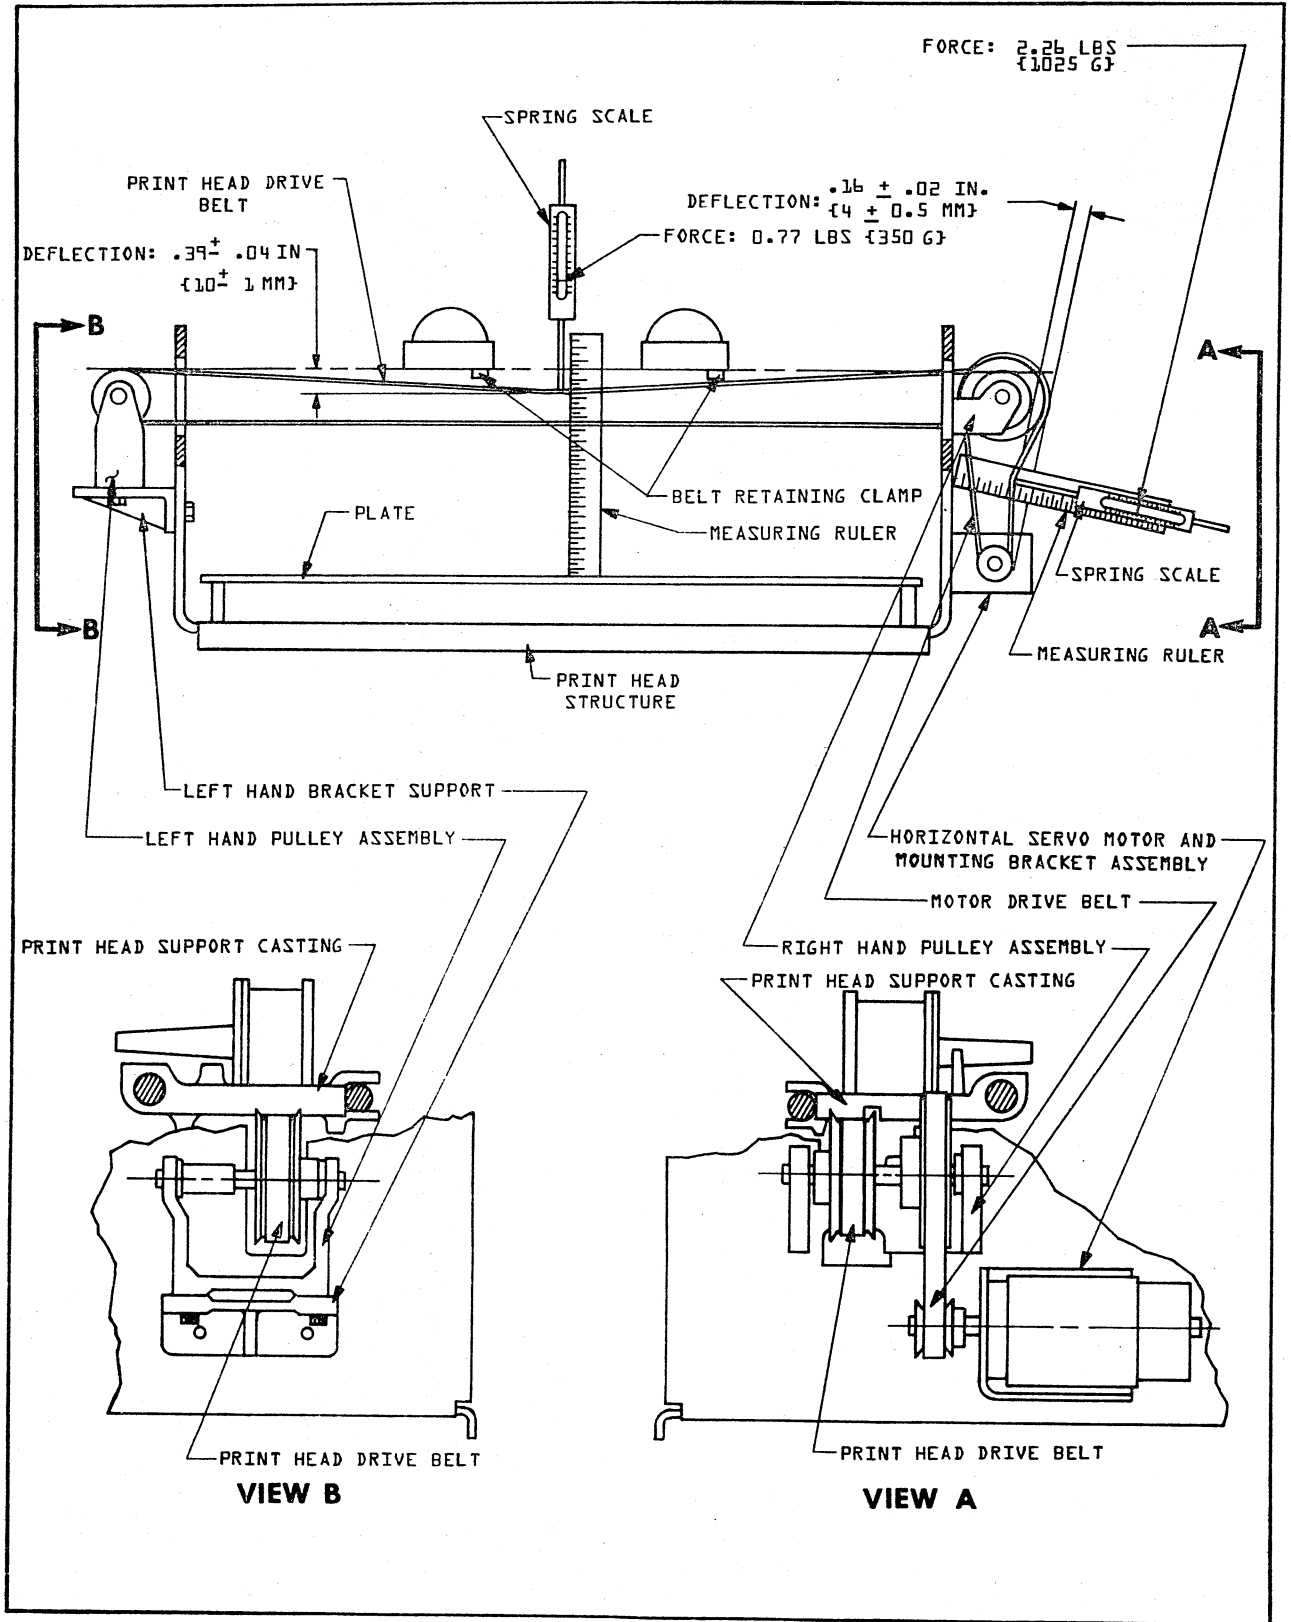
PRINT HEAD BELT DRIVE SYSTEM - ADJUSTMENTS
